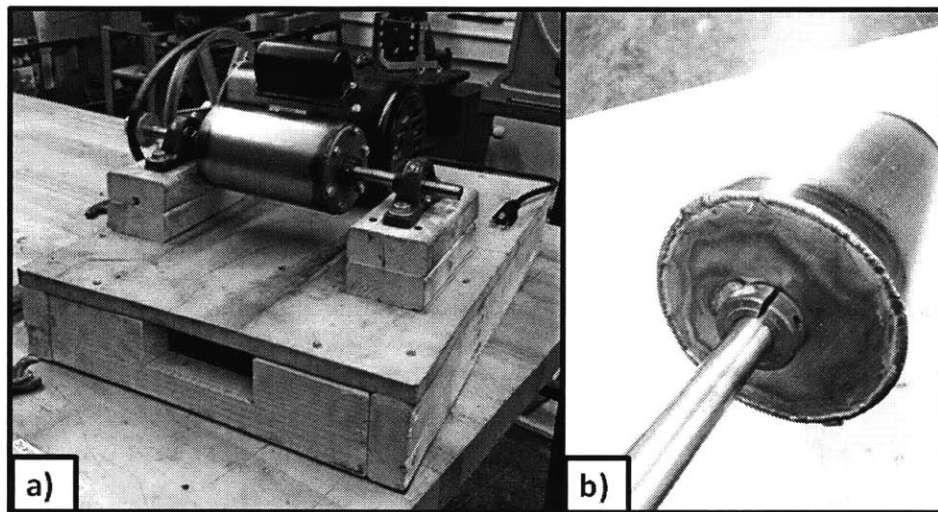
Centrifuge 1.0 a) Centrifuge 1.0; very similar to 3D model in Figure 13. b) The drum of the centrifuge was horizontal and made of steel sheet welded to round steel ends. This attachment was non-uniform and created much imbalance to the centrifuge, magnifying noise and vibration.
